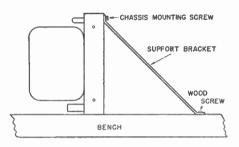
Chassis support brackets can be used to hold a chassis firmly on the workbench.
